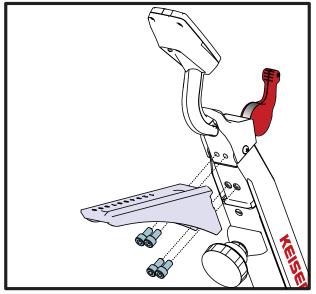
Attach the Bottom Slide to the Handlebar Tube
